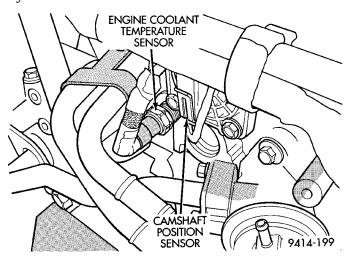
Engine Coolant Temperature Sensor— SOHC
